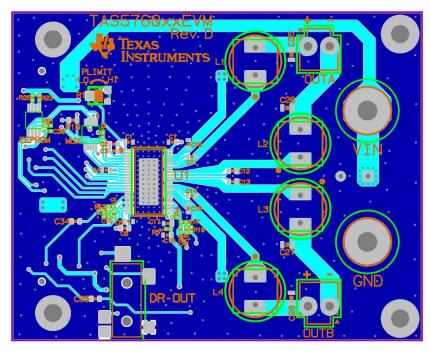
TAS5760xxEVM Rev D Top Composite Assembly
